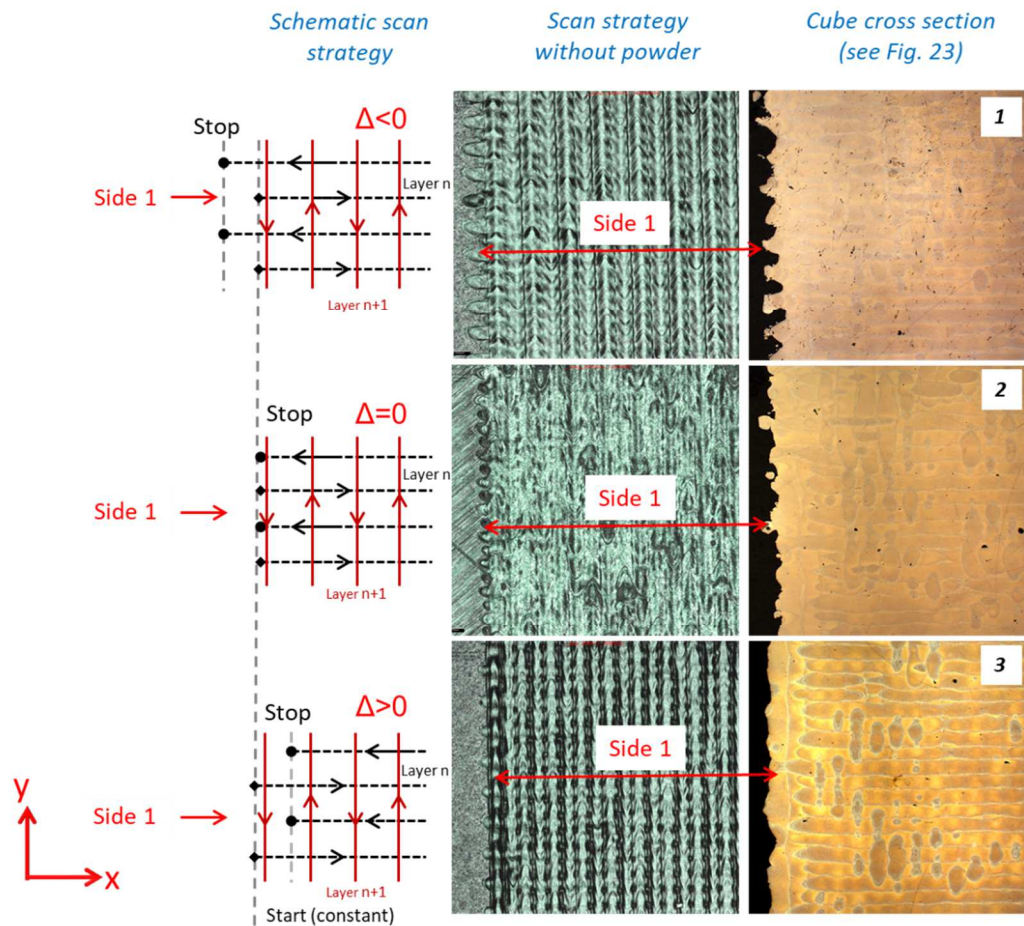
Shape of the solidified melt pool at the end and beginning of the weld track with [21] and without powder
